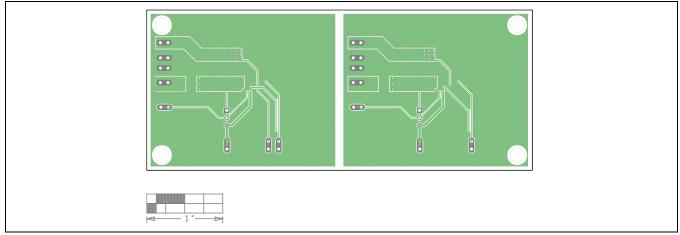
MAX17570B/MAX17570E EV Kits PCB Layout Diagram—Layer 3
